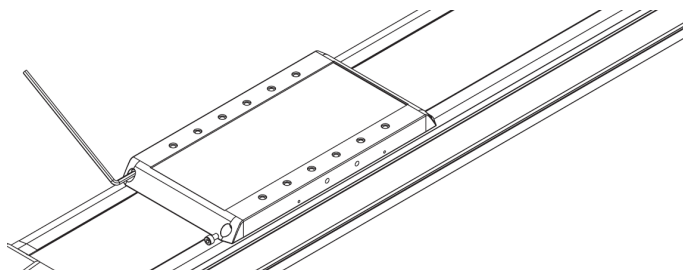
Installing the cover strip in the cover strip clamp on the HT-B
